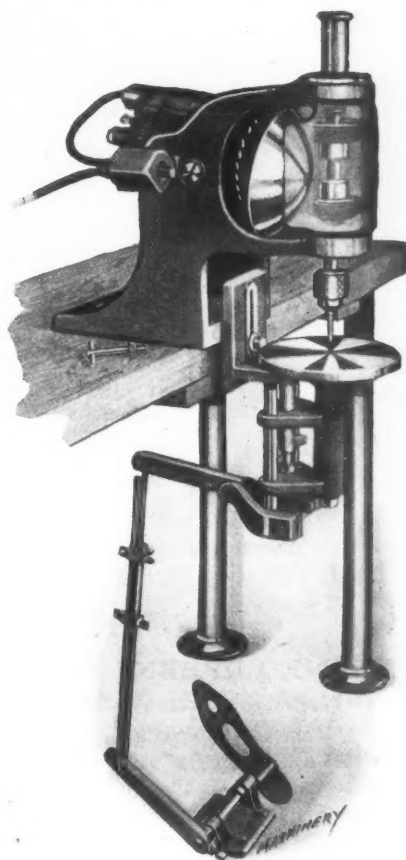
View of Anderson Tapping Machine, showing Treadle and Springs to take up Inequality of Foot Pressure and counterbalance Weight
